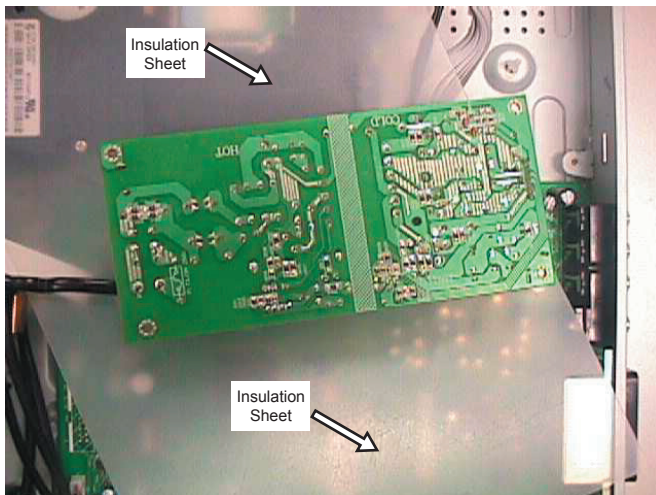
PSU Board service position (Beware of the cable connection to ANABE Board)
